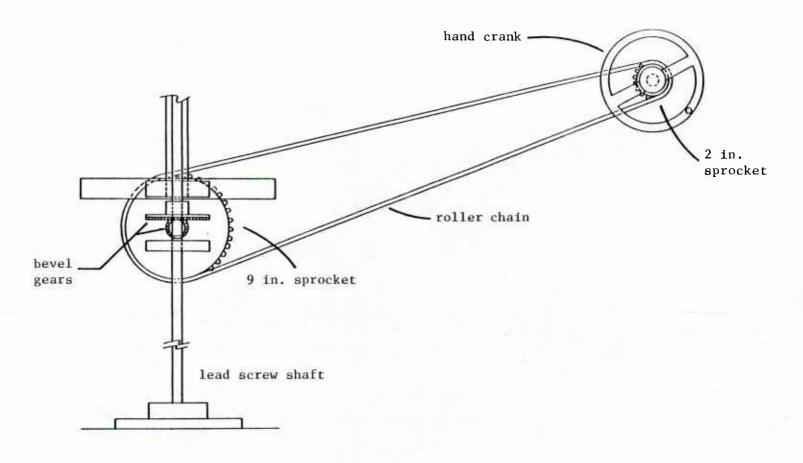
Side View of Lead Screw Shaft Crank Assembly
